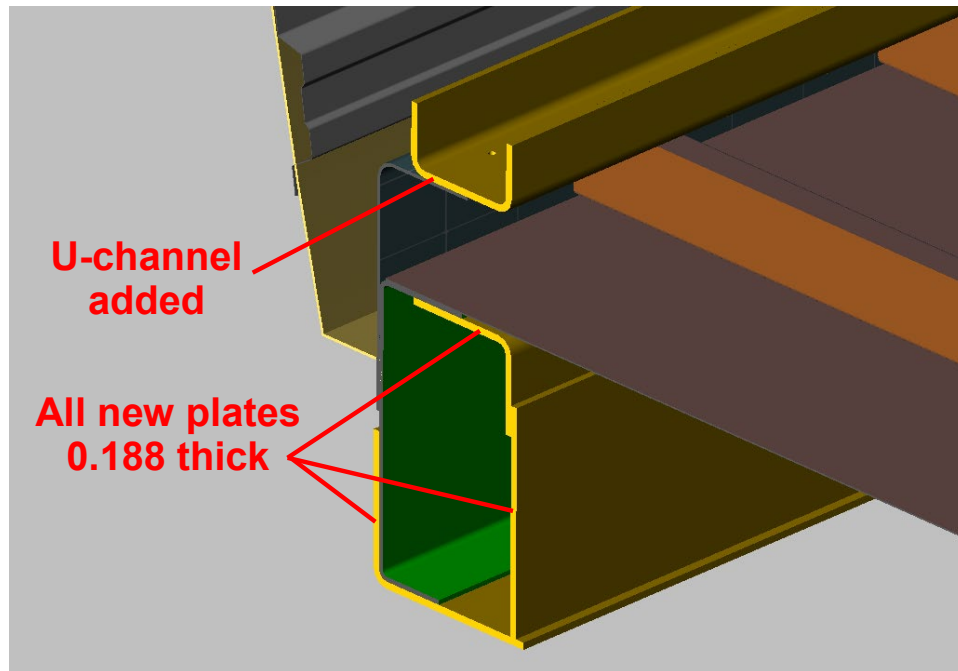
Reinforcement plates fastened to side wall and roof rail
